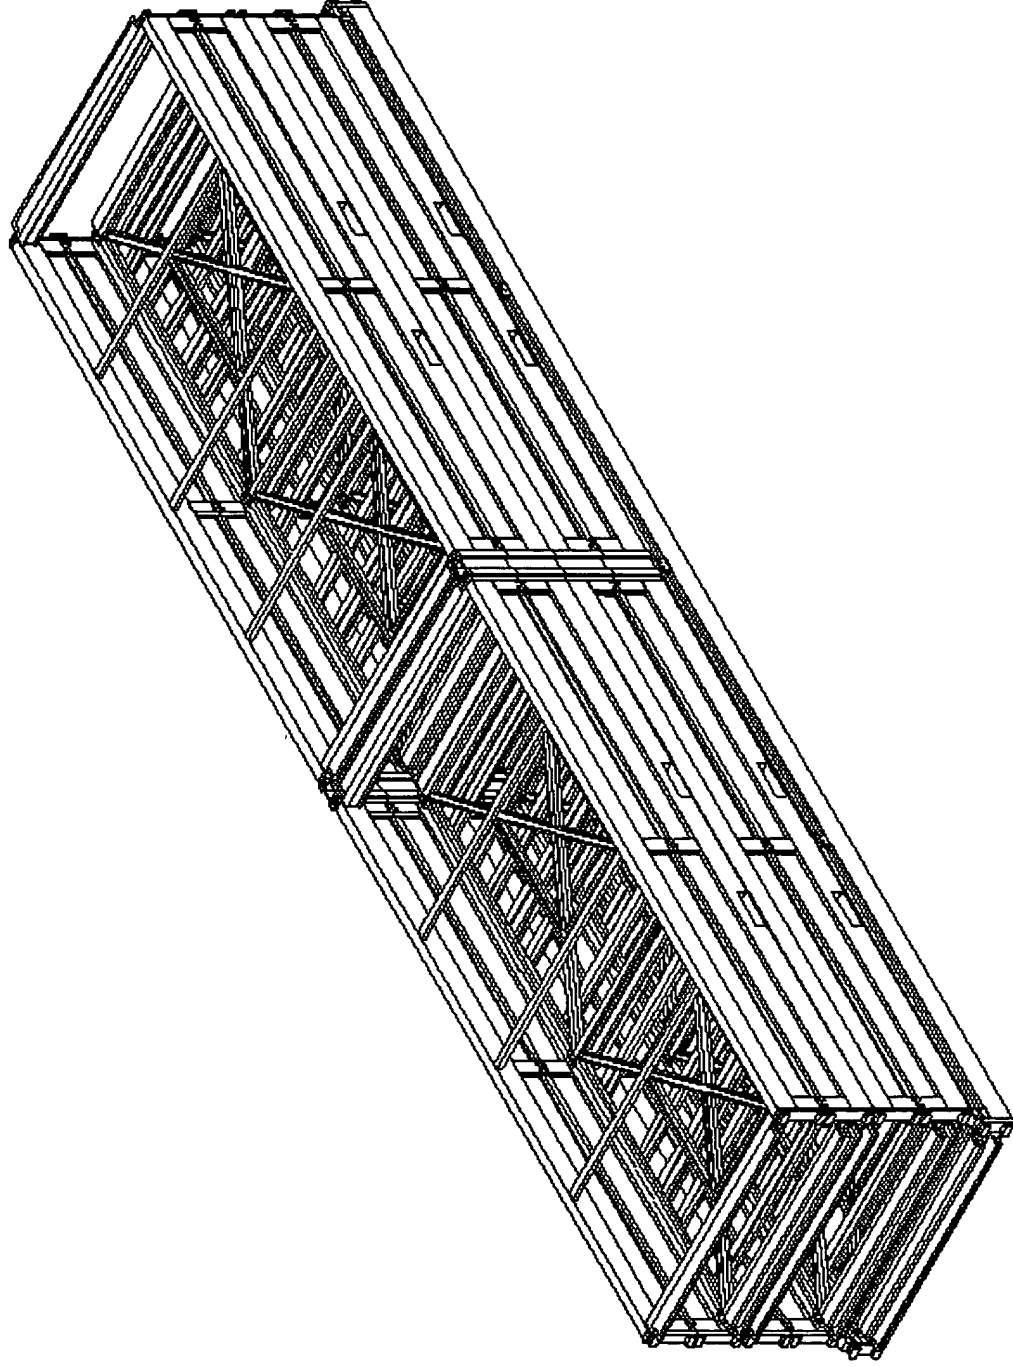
D: Step3 of disassemble and load process: The second “collapsible cargo container frame panel assembly” is stacked on top of previous assembly.
